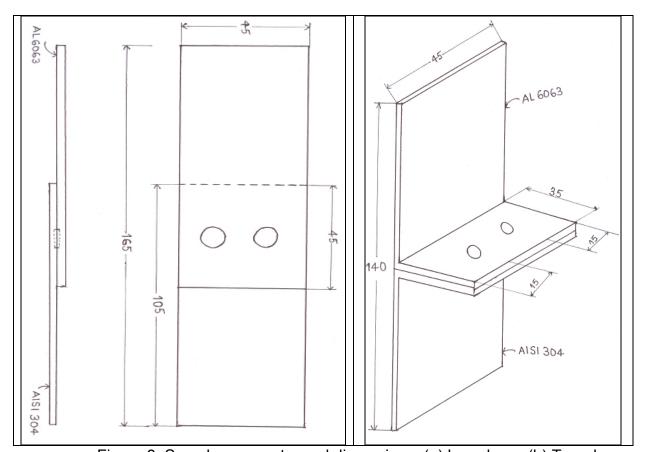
Samples geometry and dimensions: (a) Lap shear, (b) T-peel
